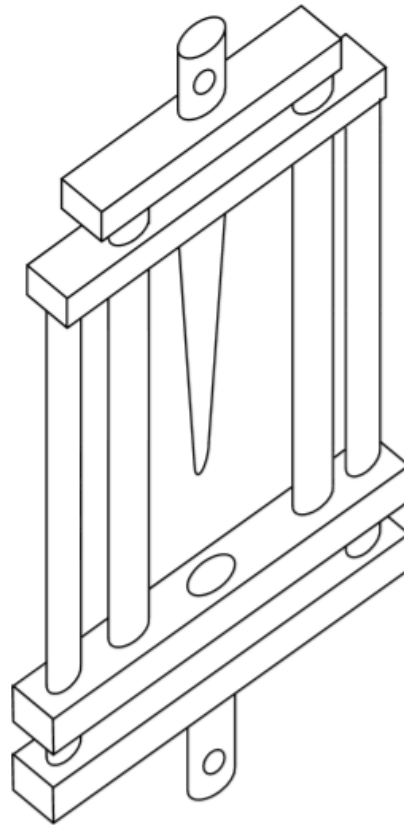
COMPRESSION JIG WITH CONICAL PLUNGER AND HOLE ON THE PLATFORM
